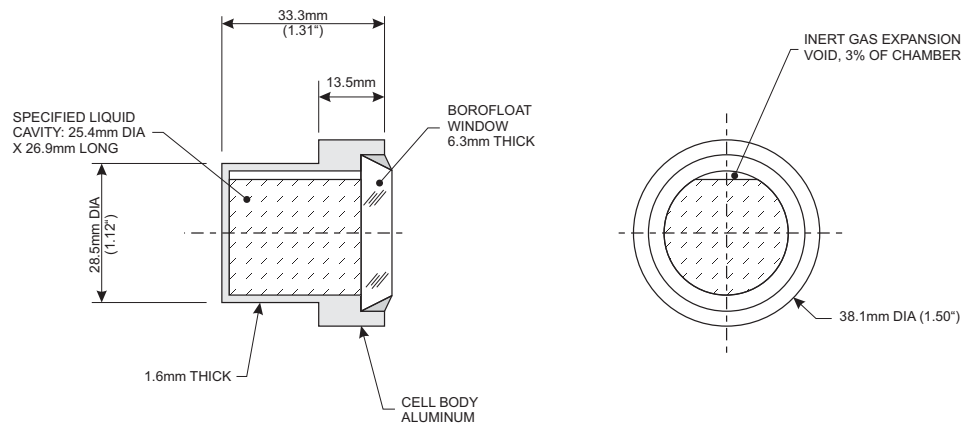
Engineering drawing of the EJ-309 scintillator used for the scatter cell in STOF.
